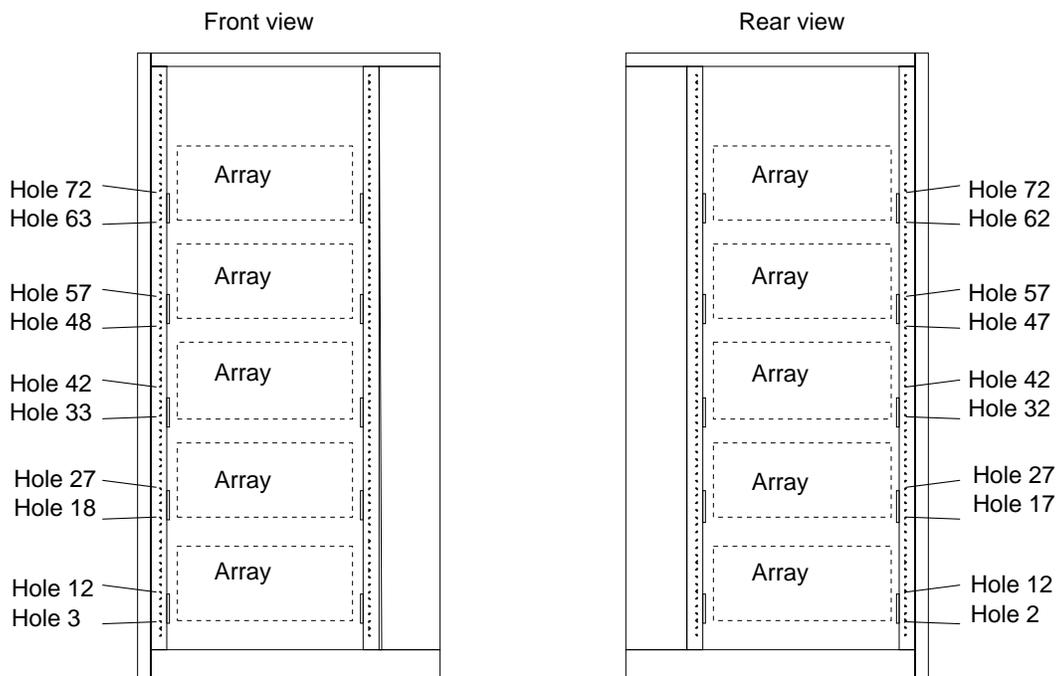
Side Rail Installation Locations and Hole Numbers in the Expansion Cabinet
